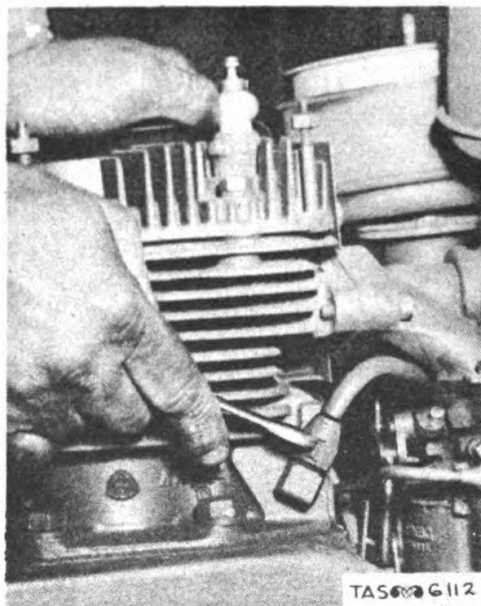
Removing Adapter Union Holding Breather Line to Engine and Disengaging Line from Engine.
